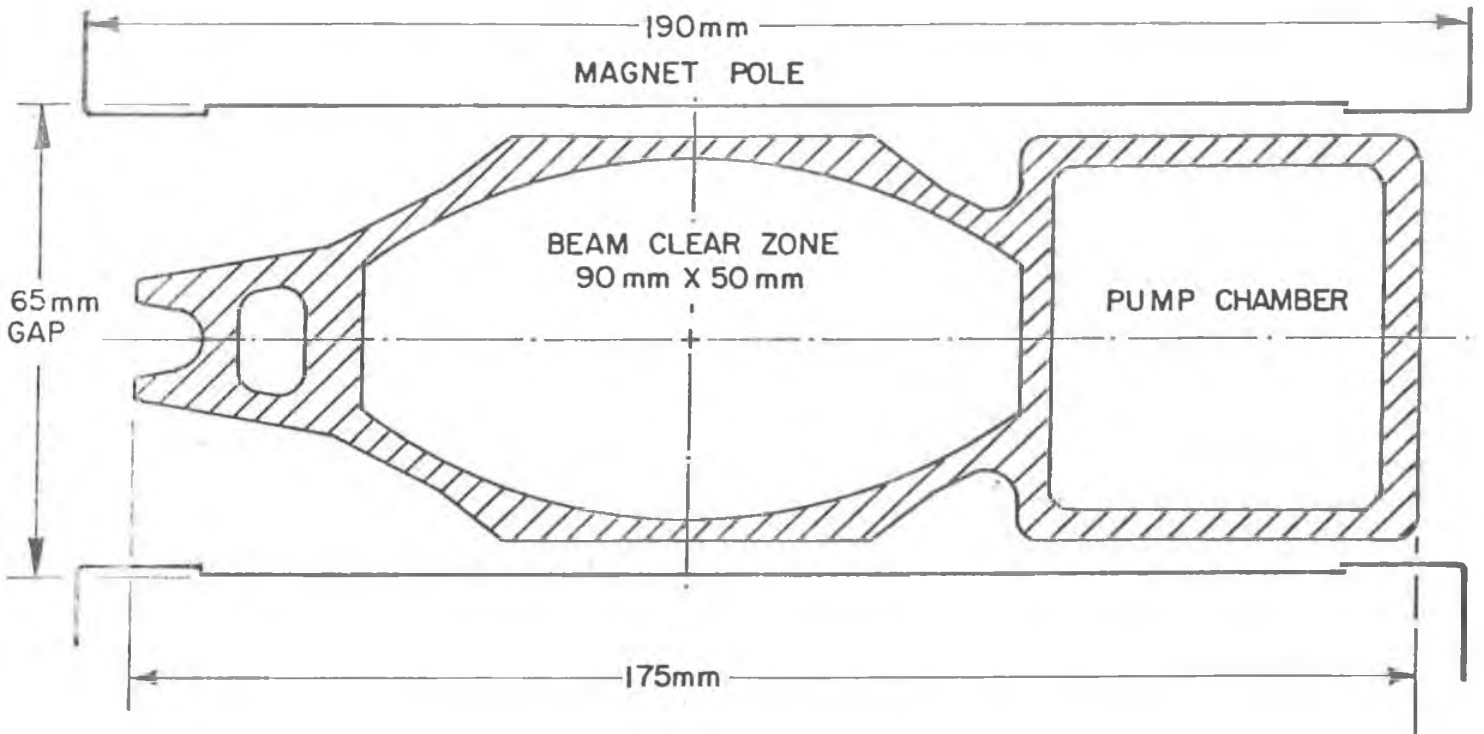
Cross-section of aluminum extrusion for the vacuum chamber
